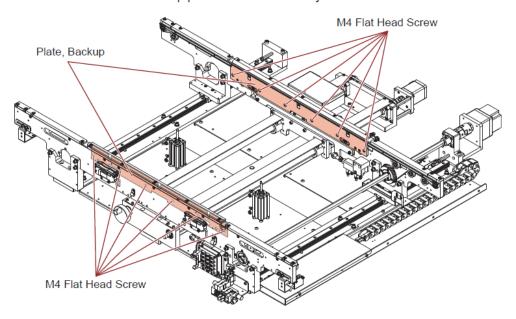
Replacement of Conveyor Belt 1 (BF-3Di-L1)
